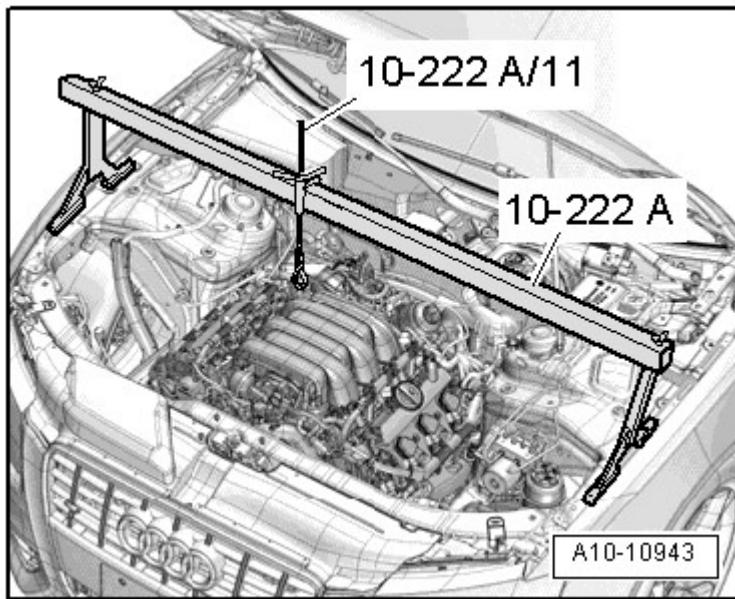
Positioning Engine Support Bridge On Left And Right Suspension Strut Tower As Shown In Illustration
